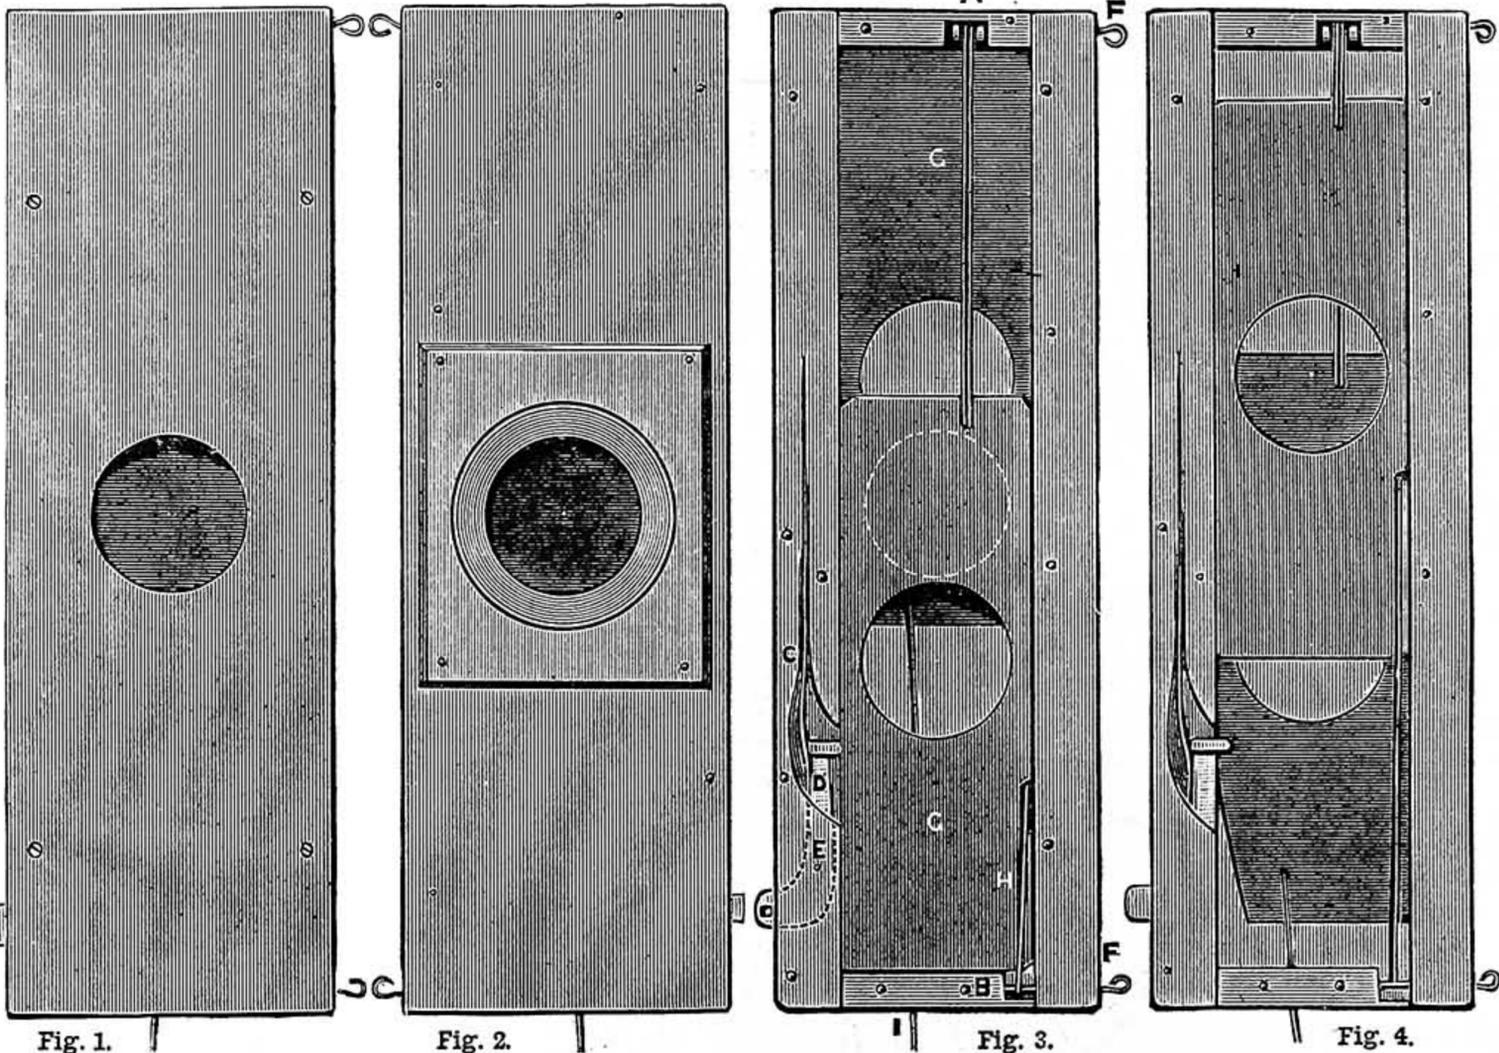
Shutter Front. Fig. 2.—Shutter Back, showing Collar to fit Lens Tube. Fig. 3.—Inside of Shutter as it appears after Exposure. Fig. 4.—Inside of Shutter as it appears when set for Exposure.
